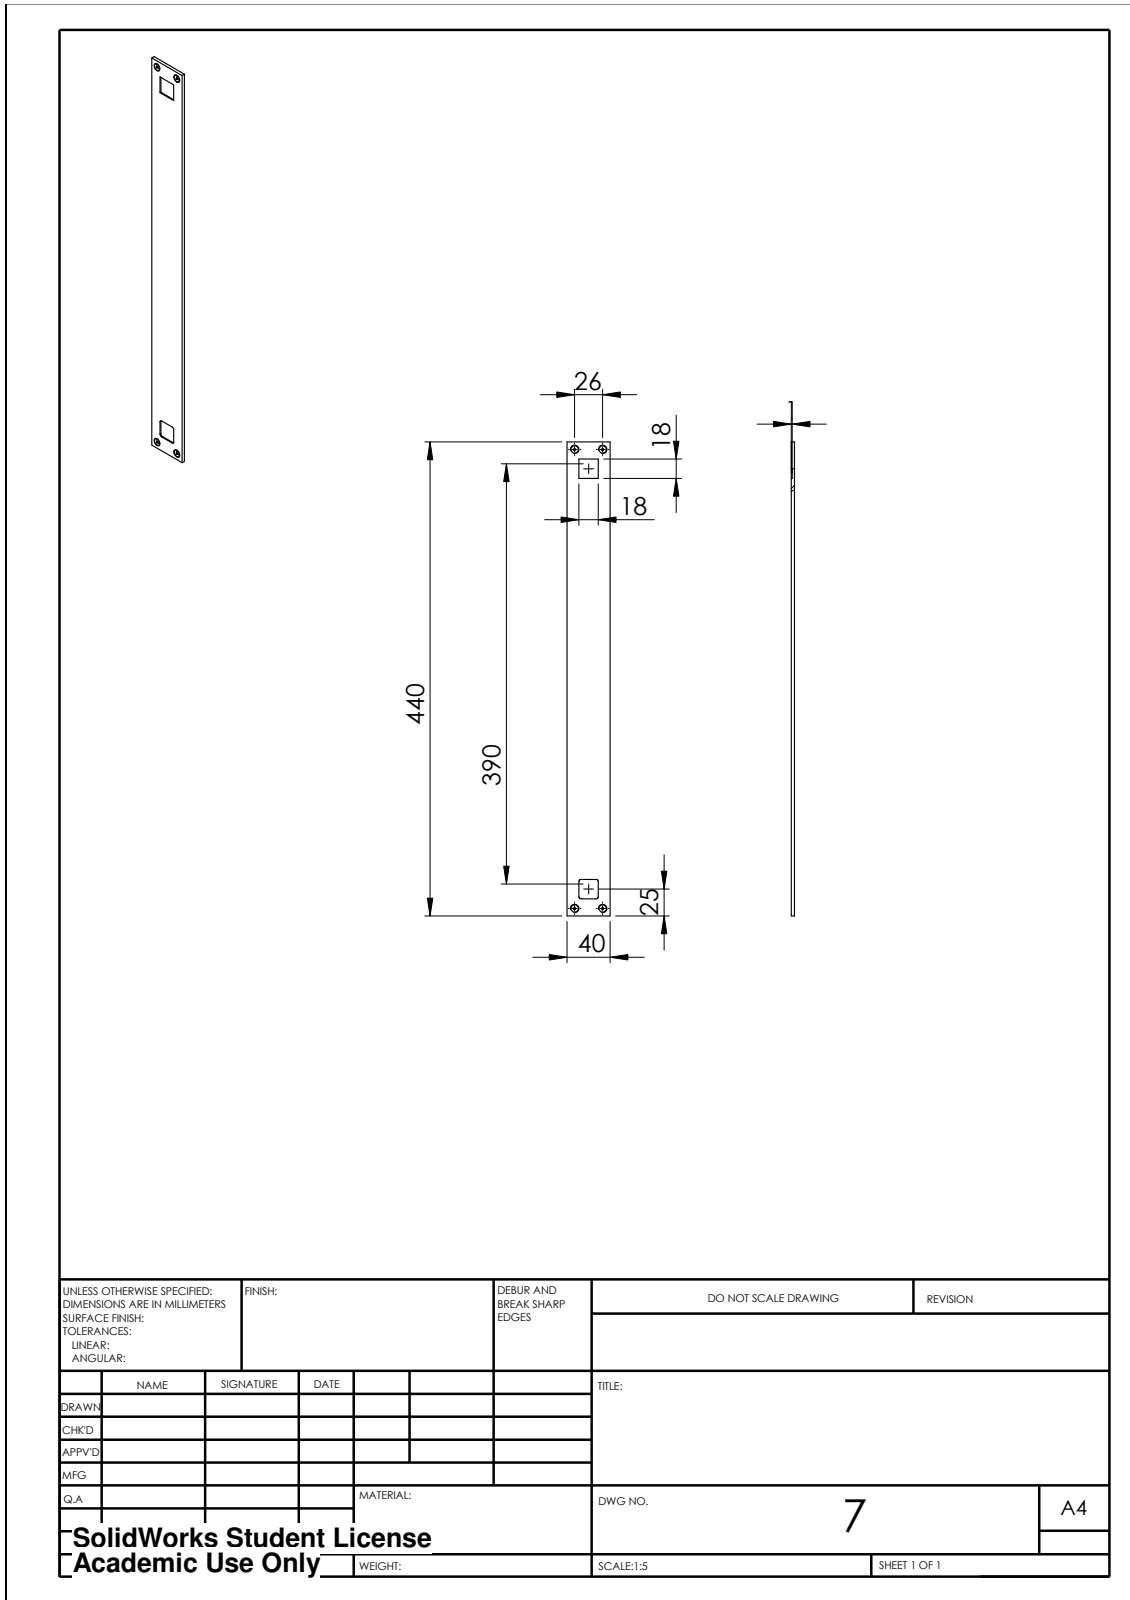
Technical drawing of the part that allows the mount of the mechanical system to a vertical surface.
